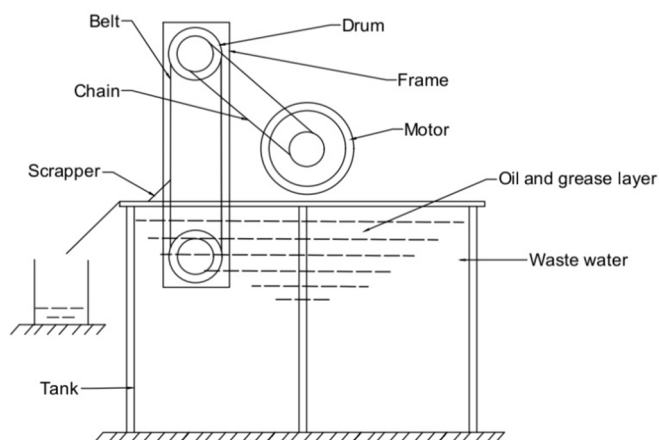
Modeling of Oil Skimmer on CAD
